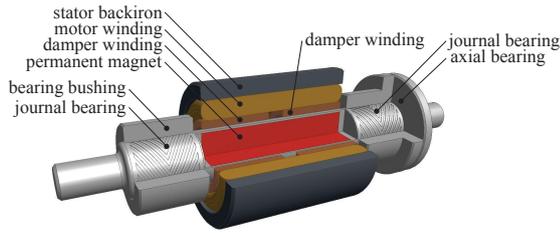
CAD Drawing of the high-speed drive system with permanent magnet rotor, gas bearings and windings for the motor and dampers
